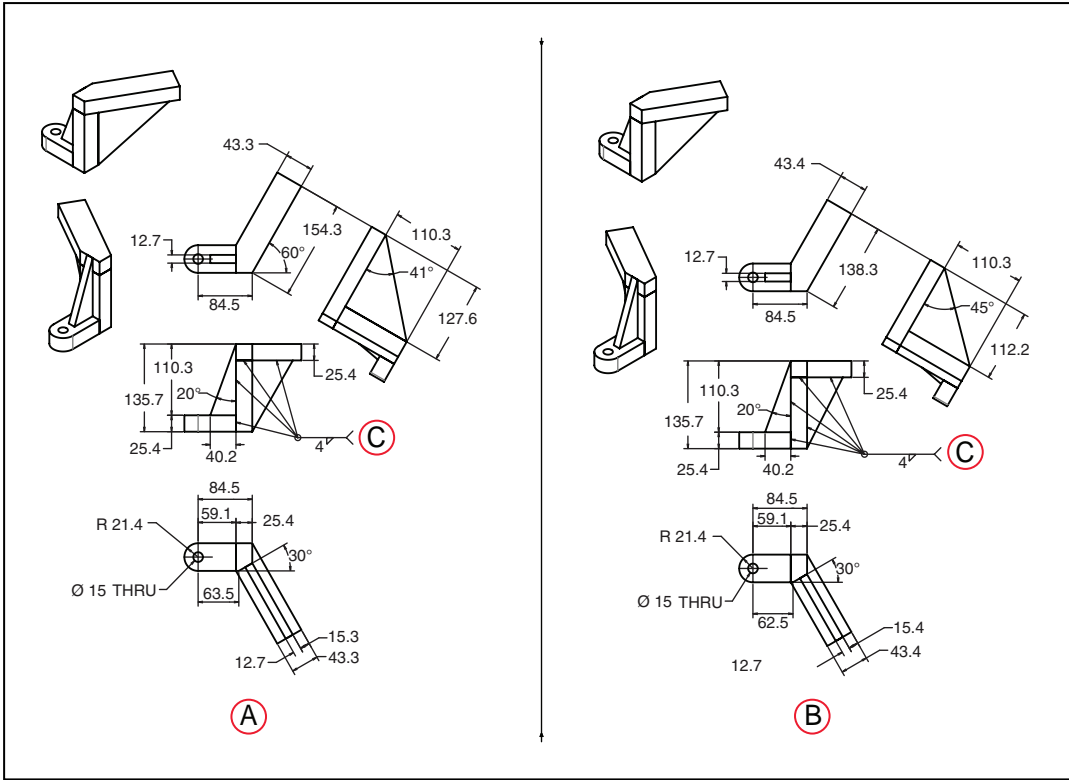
Mounting Frame, Detail Items 12 and 13
